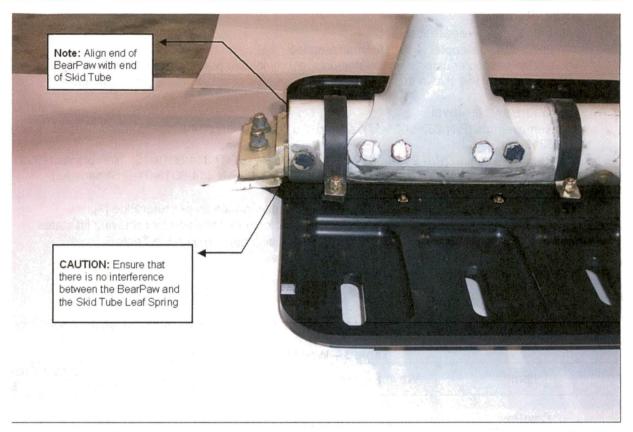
BearPaw Model BP350 (P/N 112-0002-00 or P/N 112-0002-00-S) - Alignment on Skid
